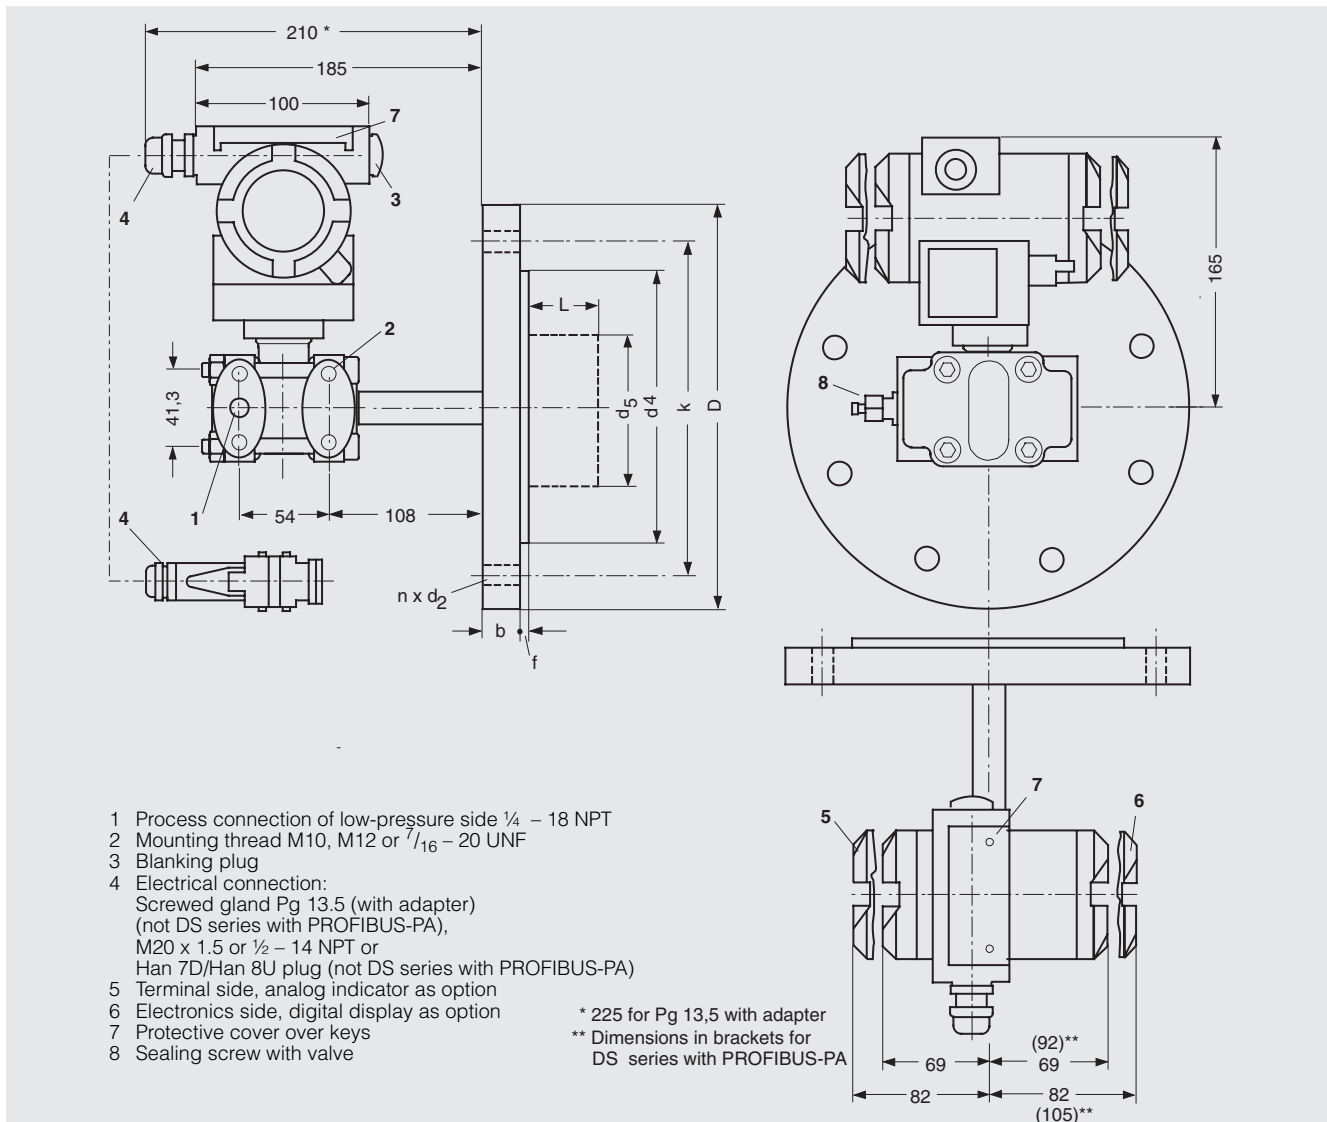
/29 Dimensions of DS series and DS series with PROFIBUS-PA (transmitter including mounting flange)
